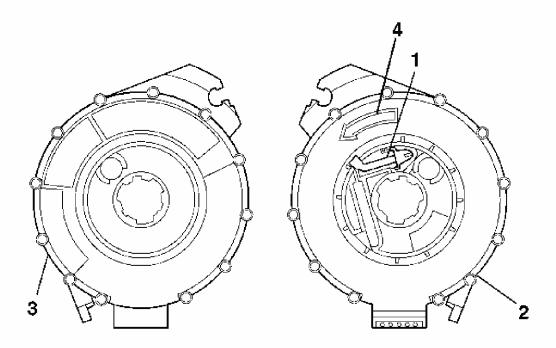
Centering SIR Coil (No Centering Window, But Back Side Includes A Spring Service Lock)
